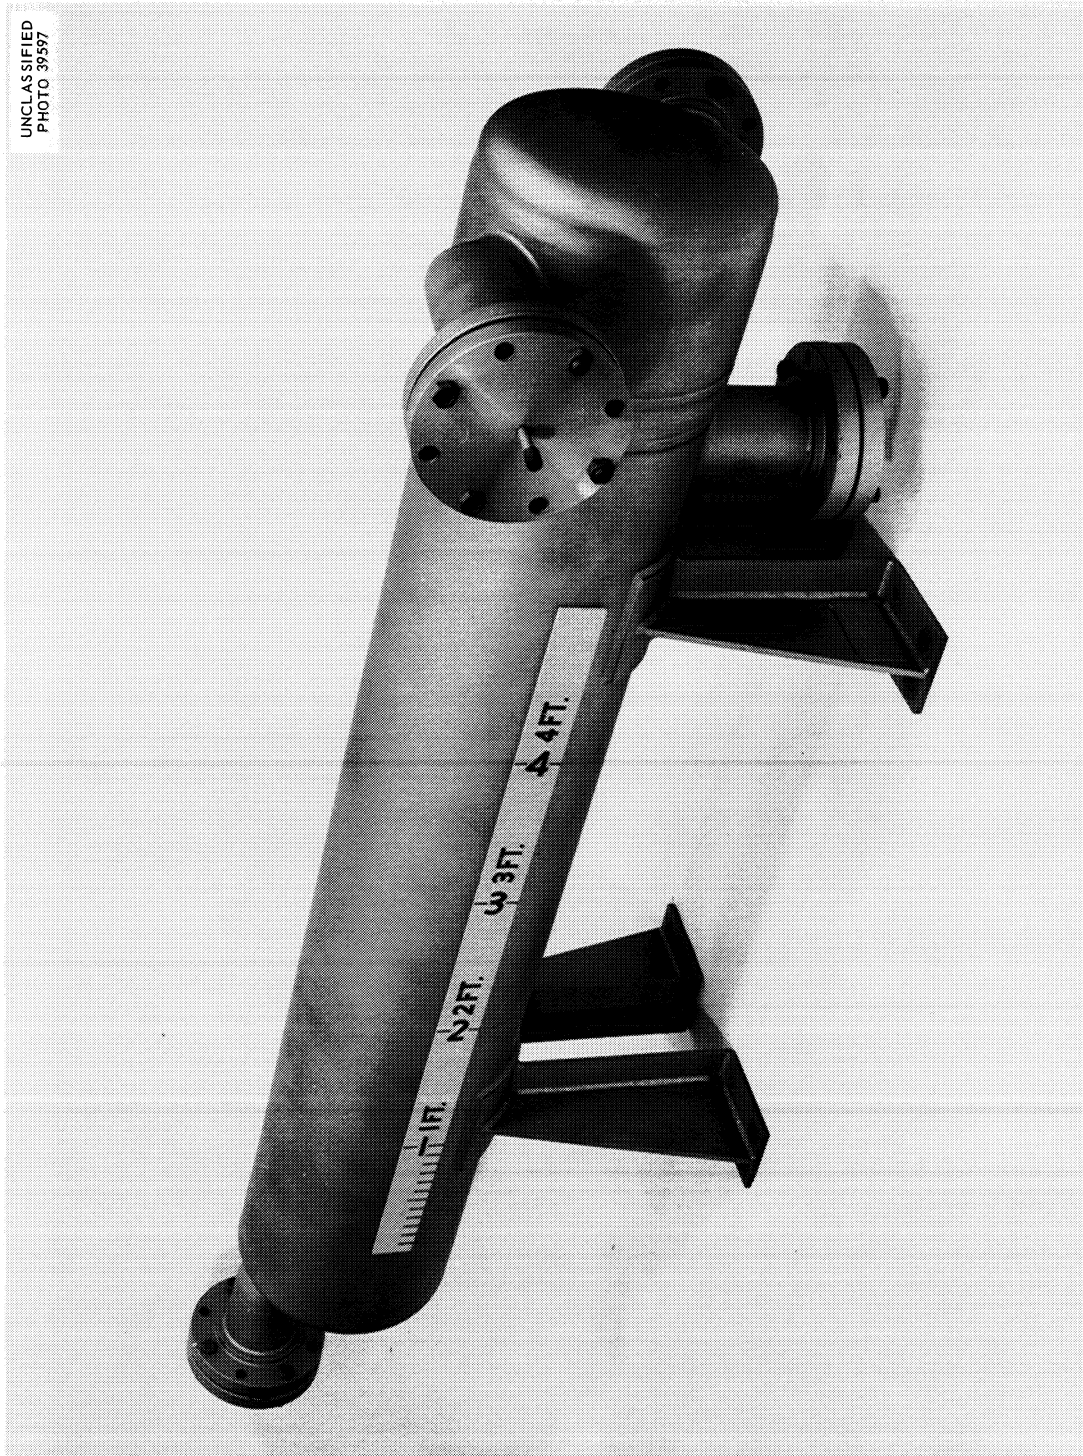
Completed Shell-Tube Heat Exchanger for MSRE.
